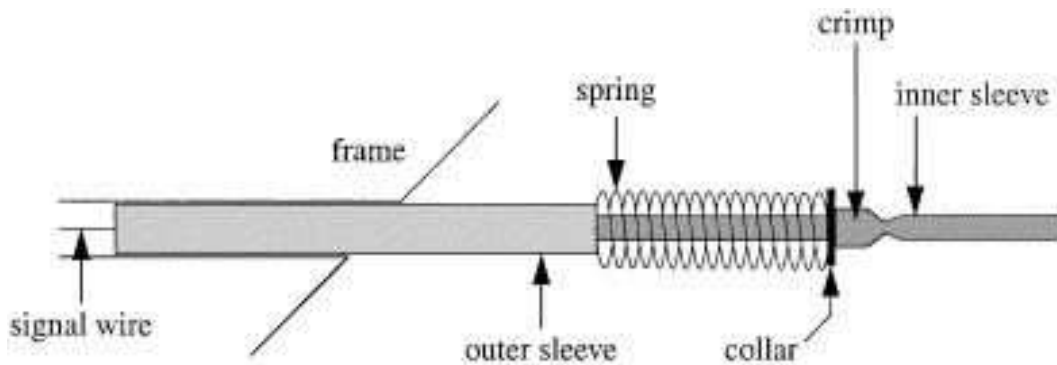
Spring loaded technique for mounting wires to the chamber frame. This detail will change for the Q_{Weak}^p VDCs. We plan to solder wires unto photo-etched frames instead.[13]
